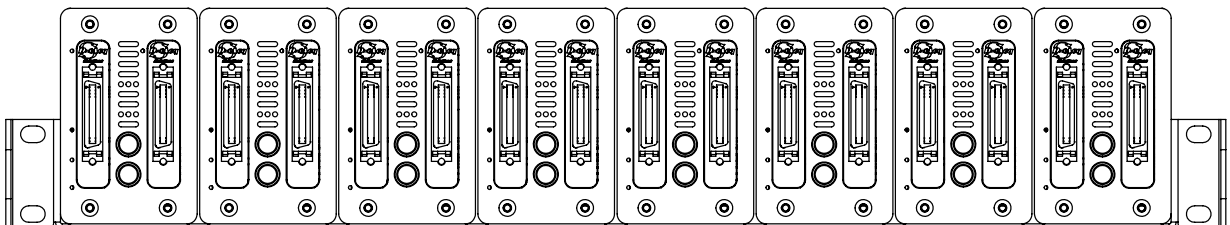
Example of 1U 19" mounting bracket with ACQ1002S
